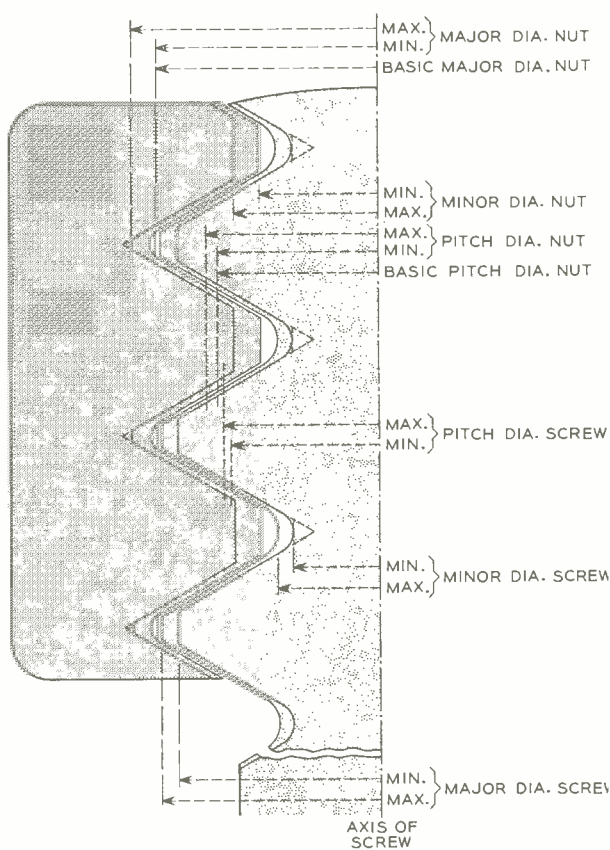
Class 2A screw and class 2B nut dimensions with tolerances.
